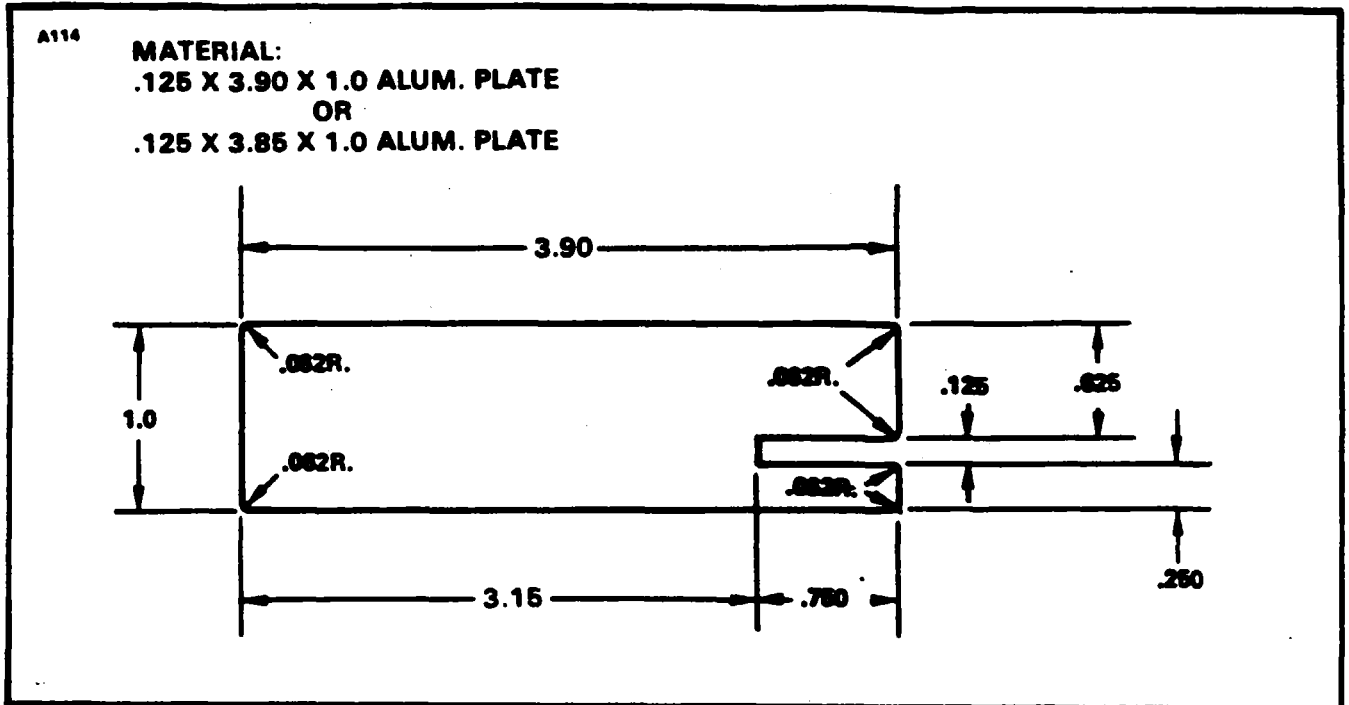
Fabricated Aileron Bellcrank Rigging Tool
